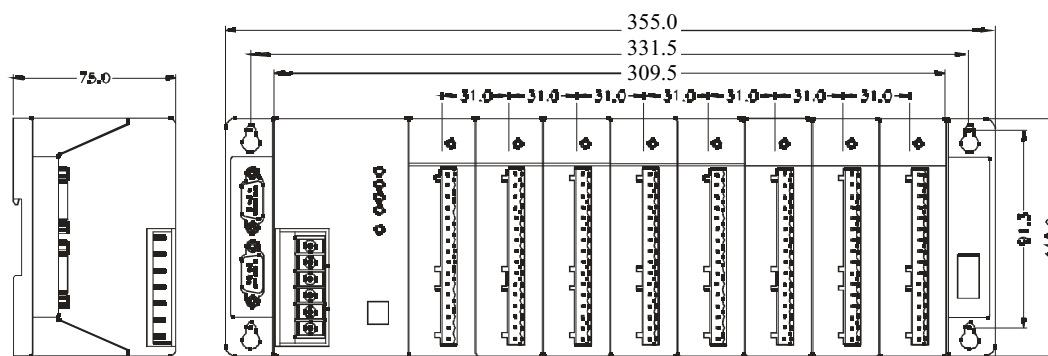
ADAM-5000/TCP system & I/O module dimensions
